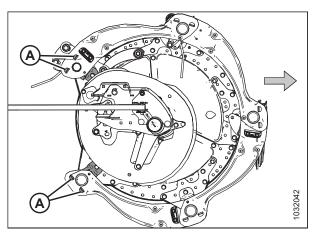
Reel Endshield Removed – Outboard Cam End
